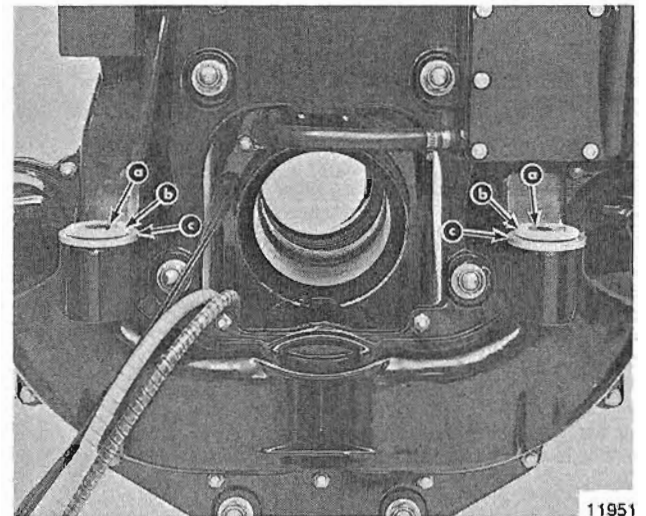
Gimbal Bearing Installation On Units Without Snap Ring Groove
